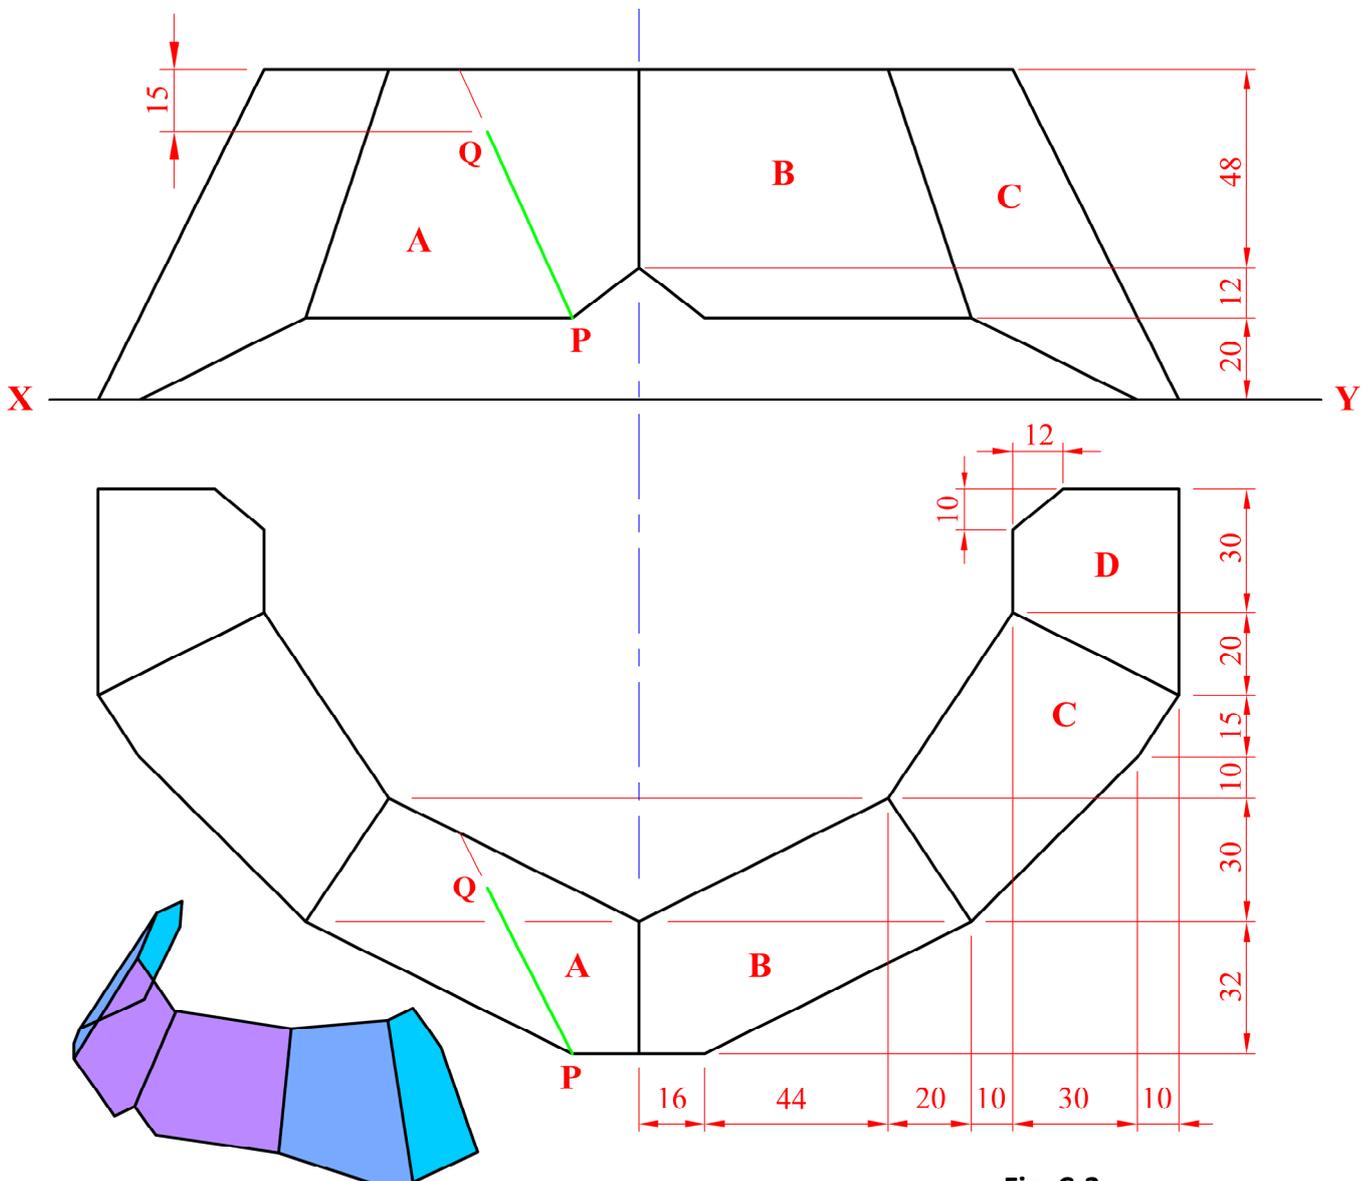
shows the plan and elevation of a set of similar windscreens on a model aeroplane.
